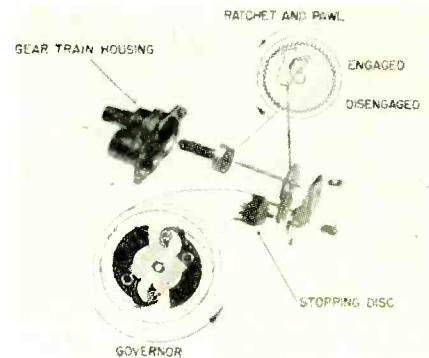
The gear train makes up a compact unit. Note that the unit incorporates a governor.
